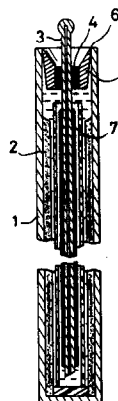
(right). Cylindrical miniature cell with glass-to-metal feed through, according to ref. 26. 1, can; 2, positive electrode; 3, filling tube and negative electrode terminal; 4, glass-to-metal seal; 5, metal cover; 6, weld; 7, lithium electrode.
